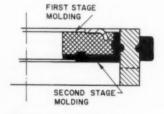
Two-stage molding operation permits use of low glass premix in outer molding and involves little material inside large ring insert, thus eliminating both problems illustrated in Fig. 31.
